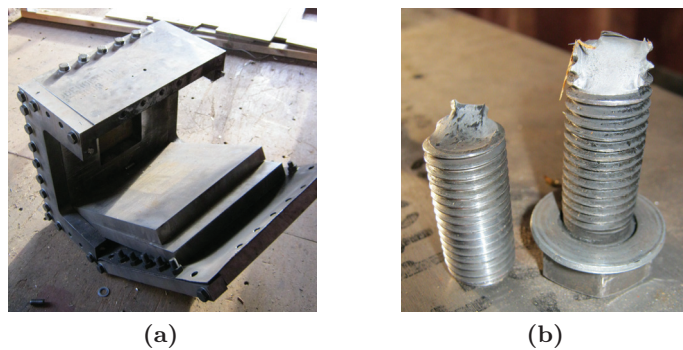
Failure of blast box after fracture of bolt along on frame edge
